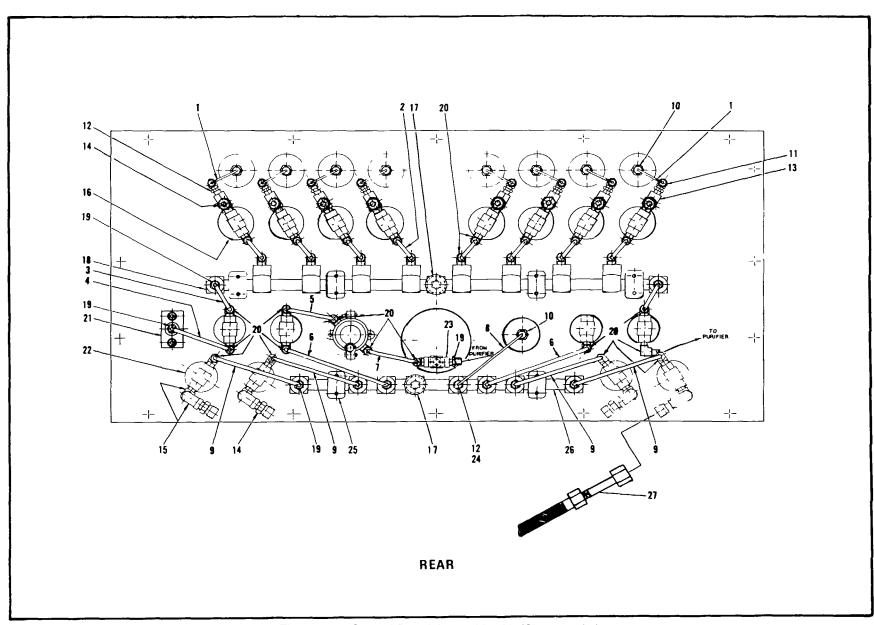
Control Panel Assembly, Air (Sheet 2 of 2).
